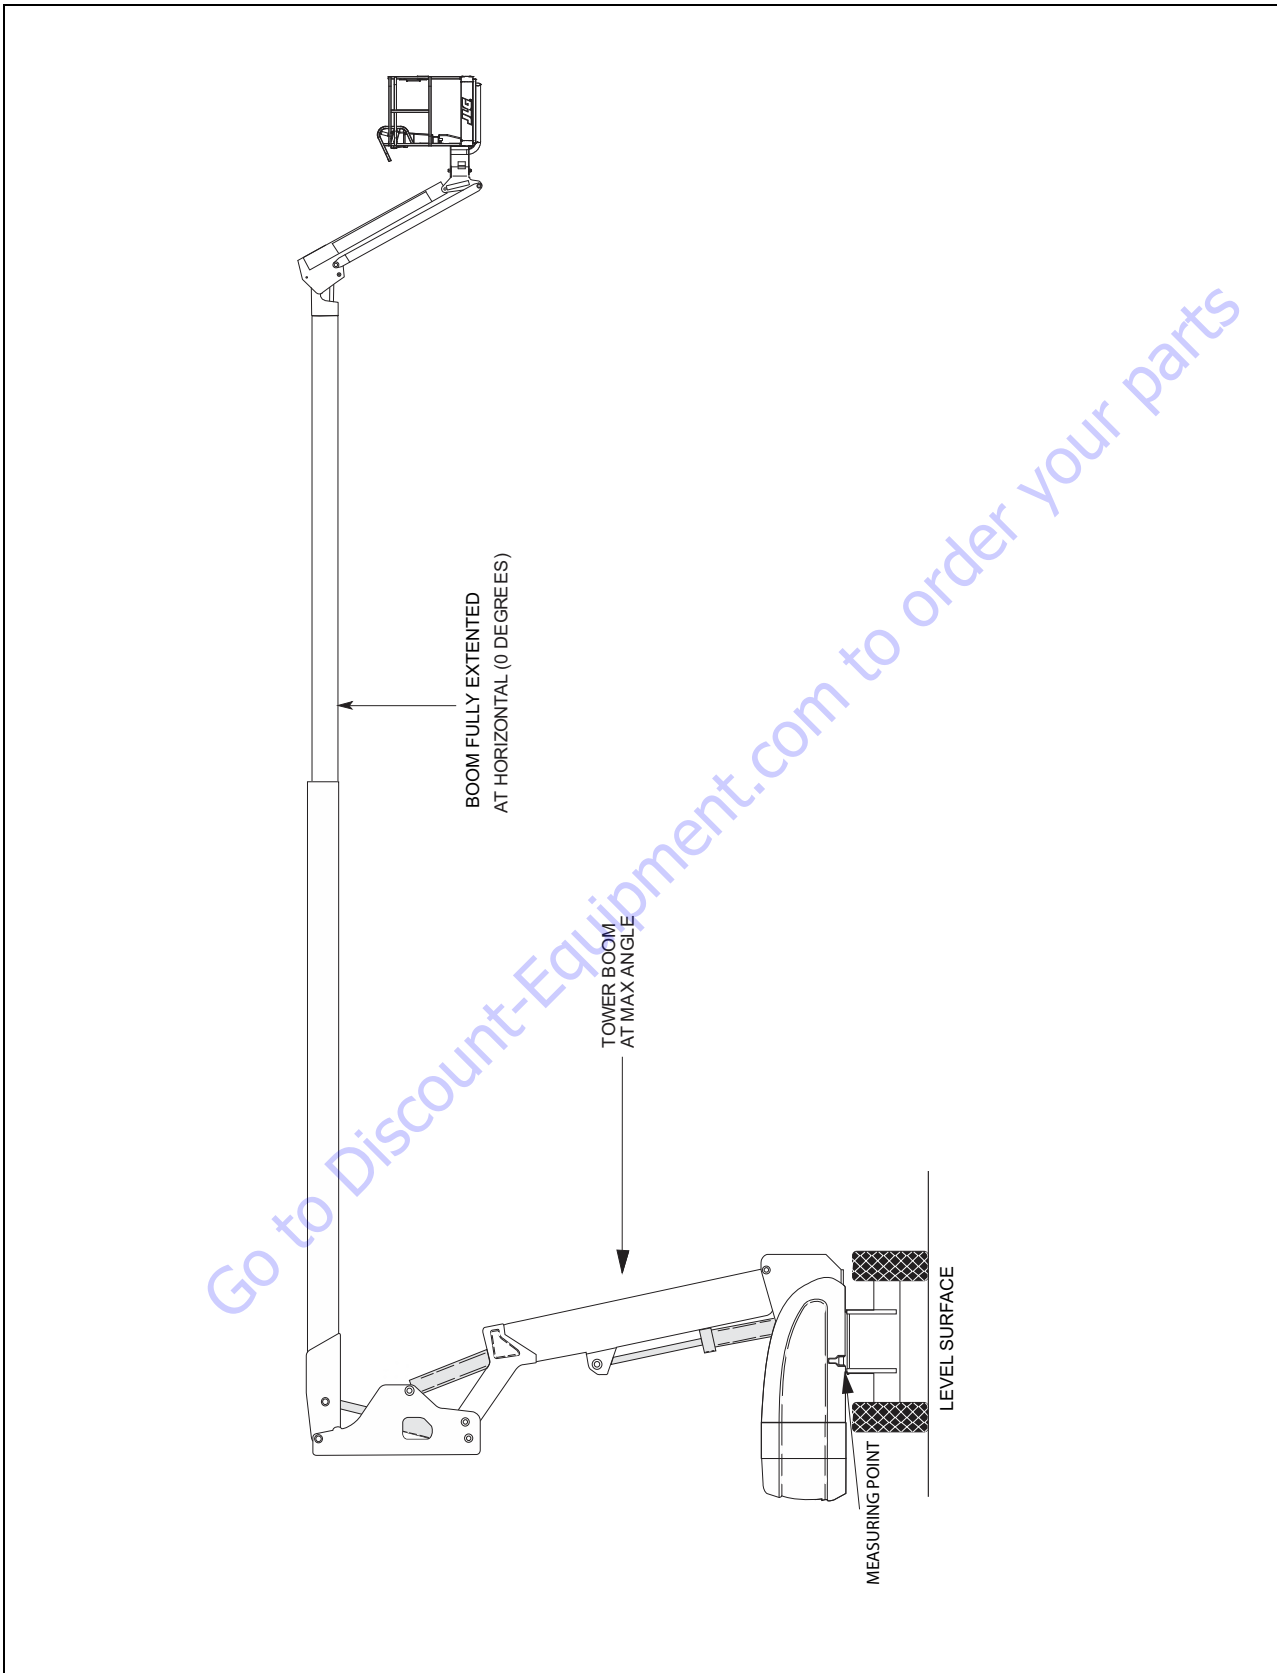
Swing Bearing Tolerance Boom Placement (Sheet 2 of 2)
